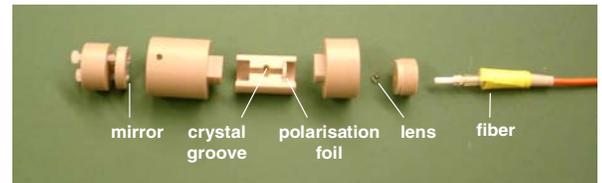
Exploded view of the reflection mode Faraday position sensor
